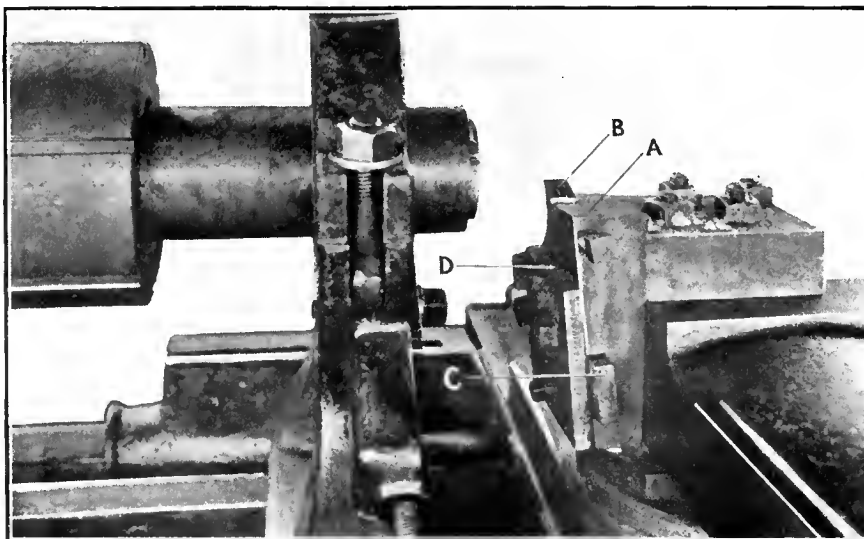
OVERHUNG TOOL HOLDER FACING-OFF SHELL BASE.
